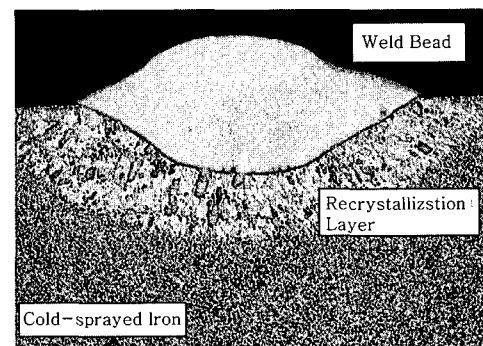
Filler-metal weld bead readily formed on cold-sprayed iron structure, showing thermal transport evidenced by recrystallization and grain growth below the bead
